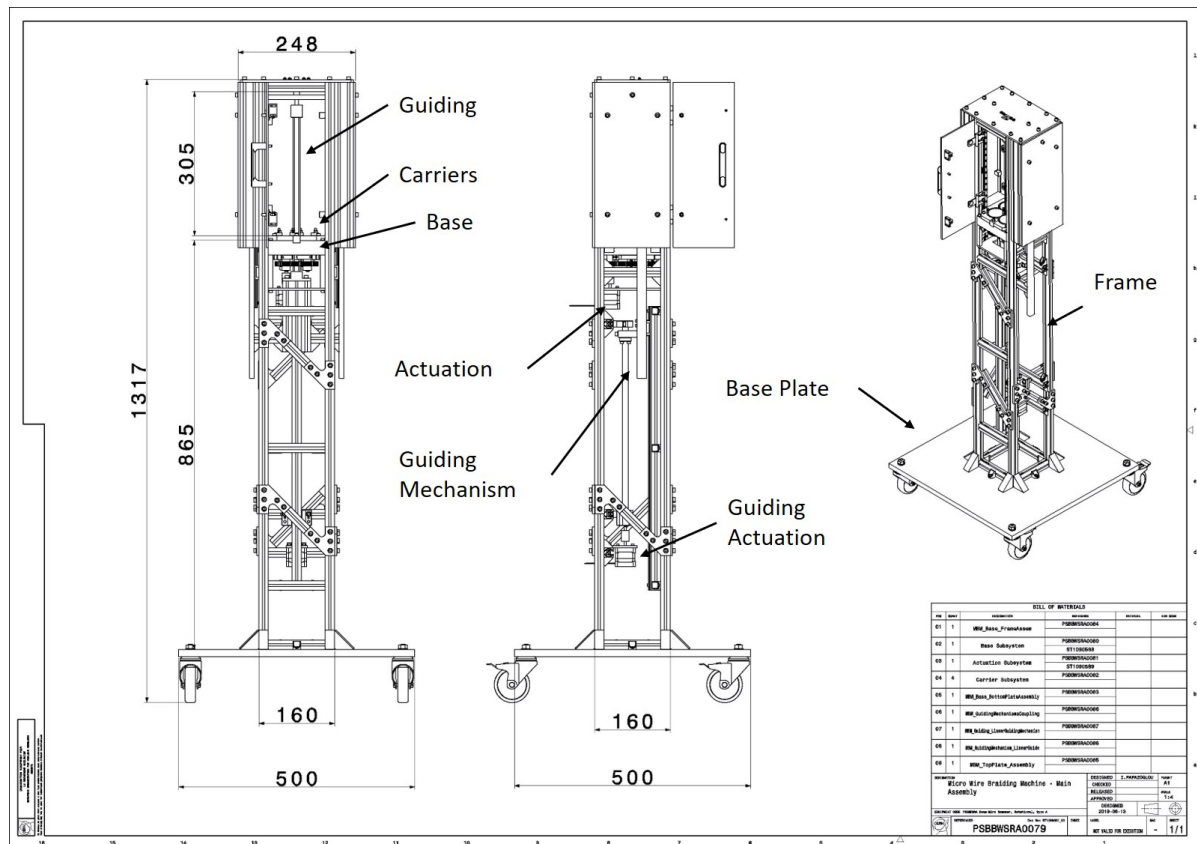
Simplified drawing for the main assembly of the braiding machine based on [19].
